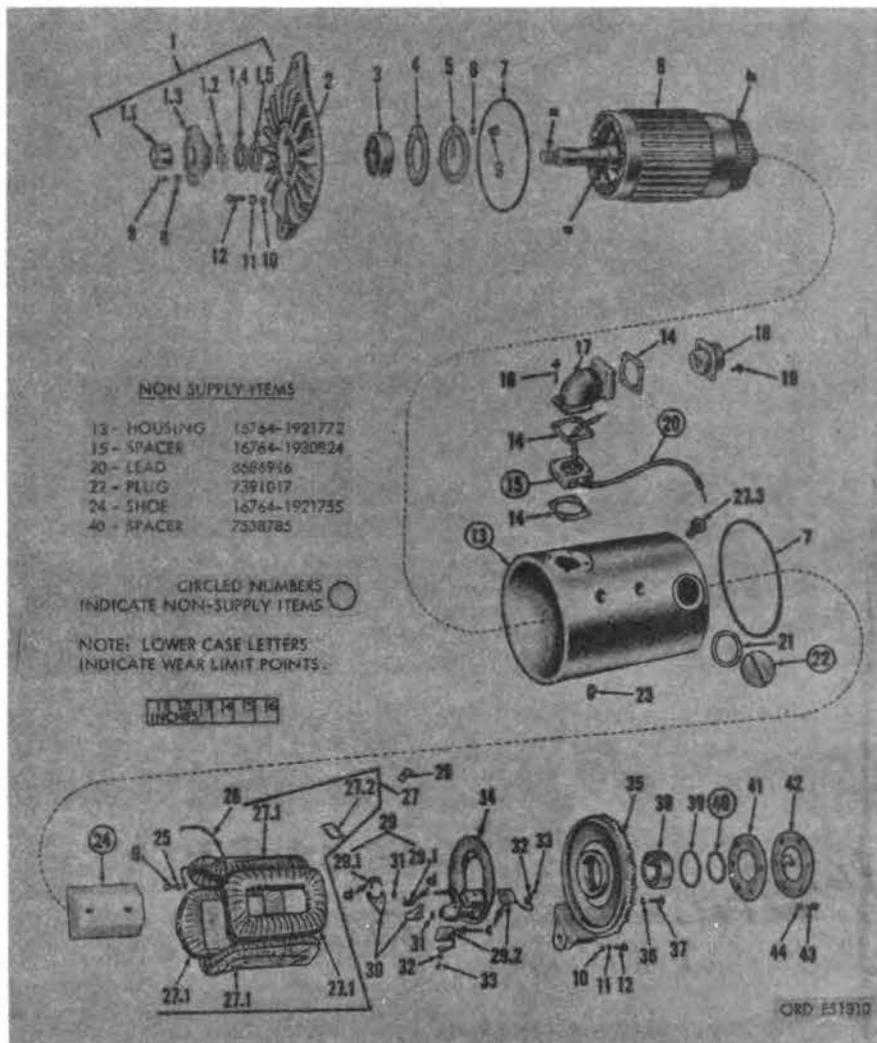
GENERATOR ASSEMBLY - EXPLODED VIEW.
